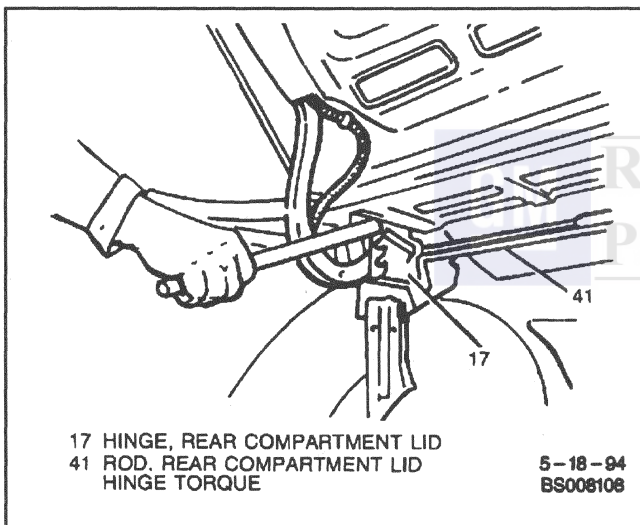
Removing or Adjusting the Rear Compartment Lid Hinge Torque Rod
